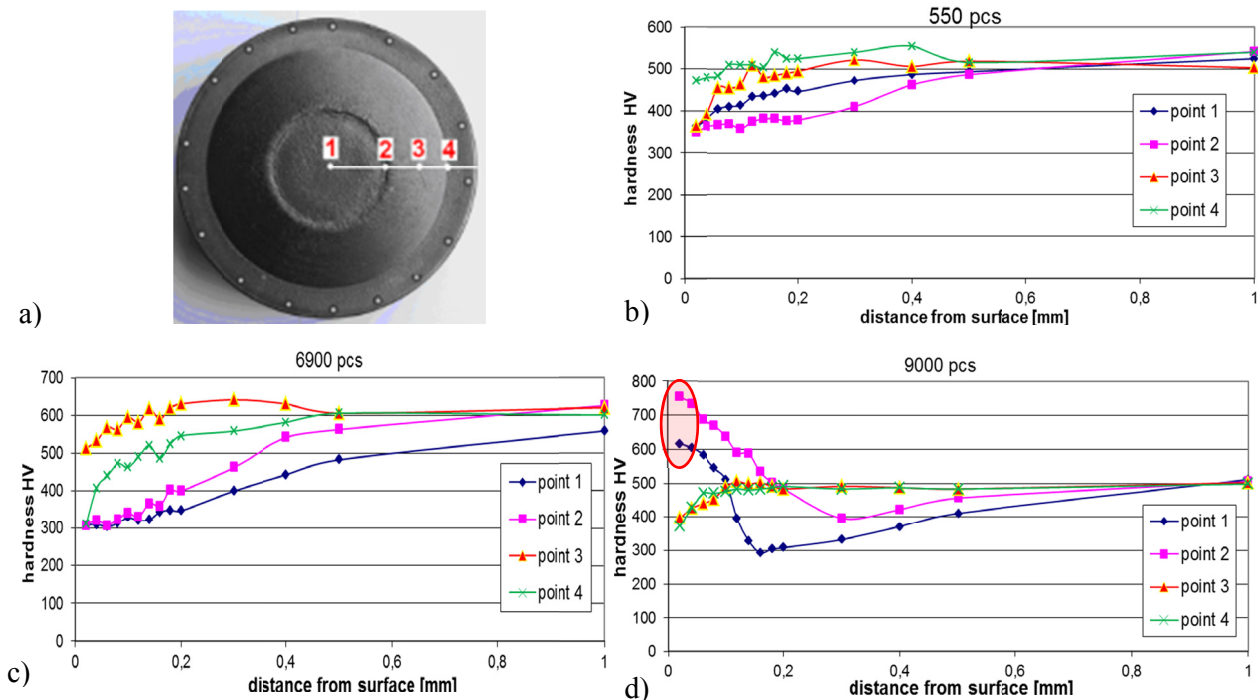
The hardness distribution for inserts from the first operation: a) view of the tool with marked measurement points, b) results for an insert after producing 550 forgings, c) 6900 forgings, d) 9000 forgings
